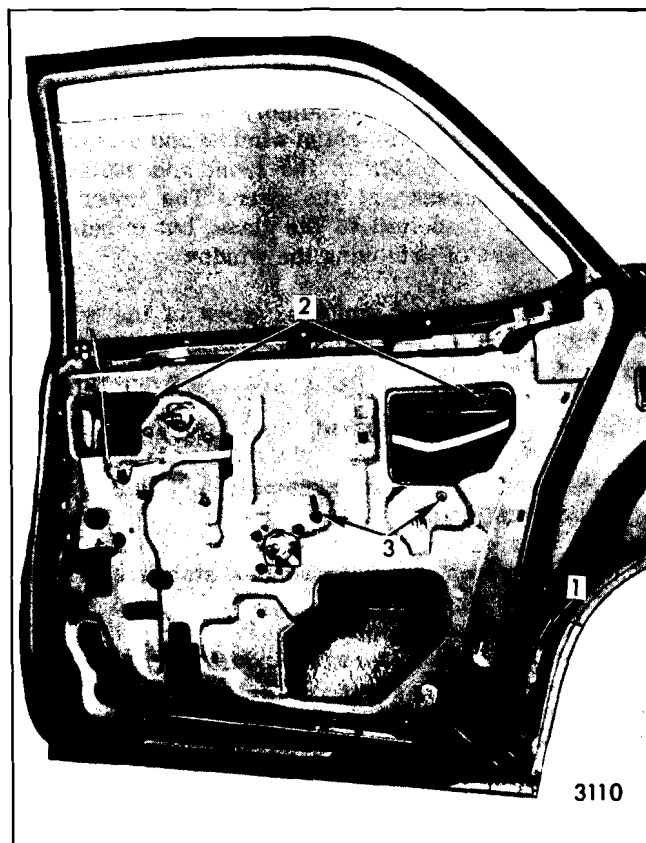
Rear Door Window Removal and Adjustments - "B" Closed Styles
